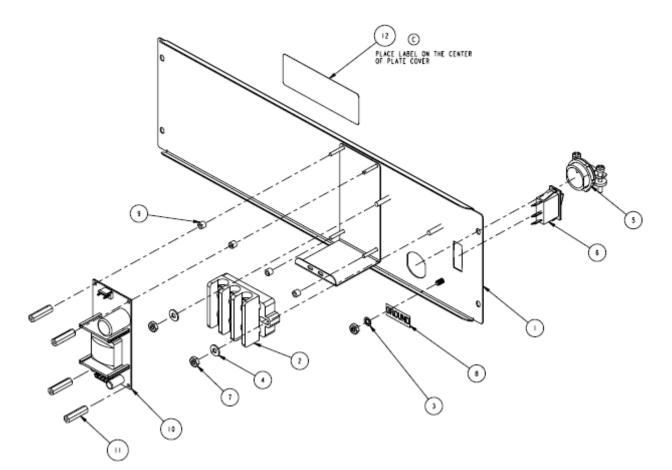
190.00 CE ASSS'Y., CBS-2131, 3kW/240VAC, 1 GAL.,
